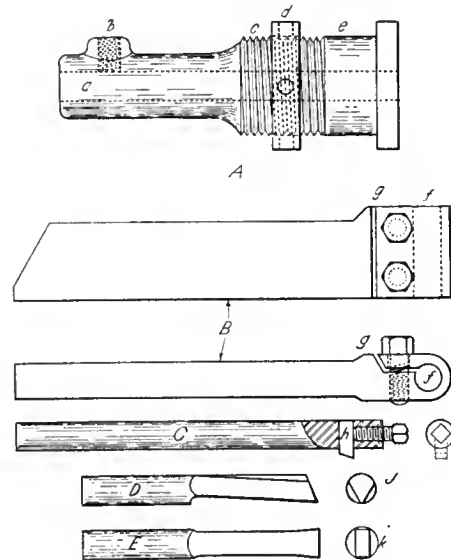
SPECIAL SHAPER TOOLS FOR DIE MAKER.
